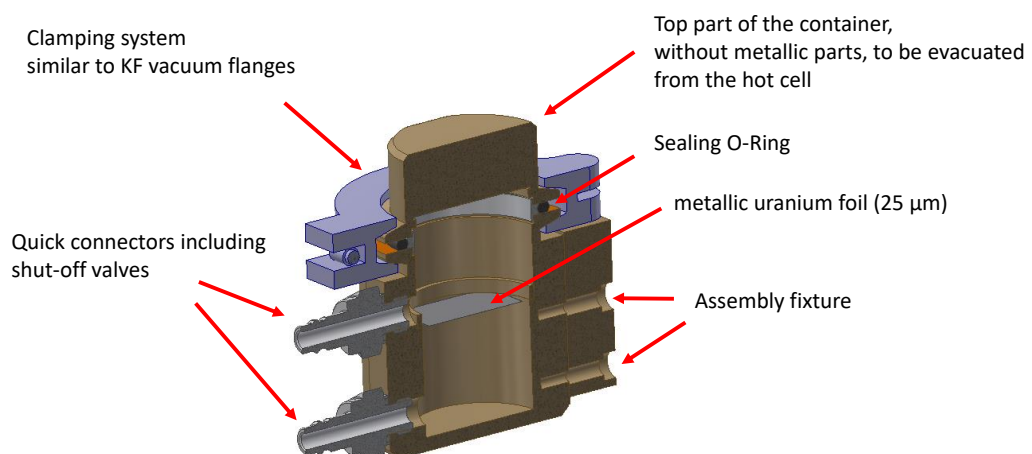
Sketch of a gas container. Two containers, supporting parts and a KUKA robot handle are combined to form the sample assembly.
